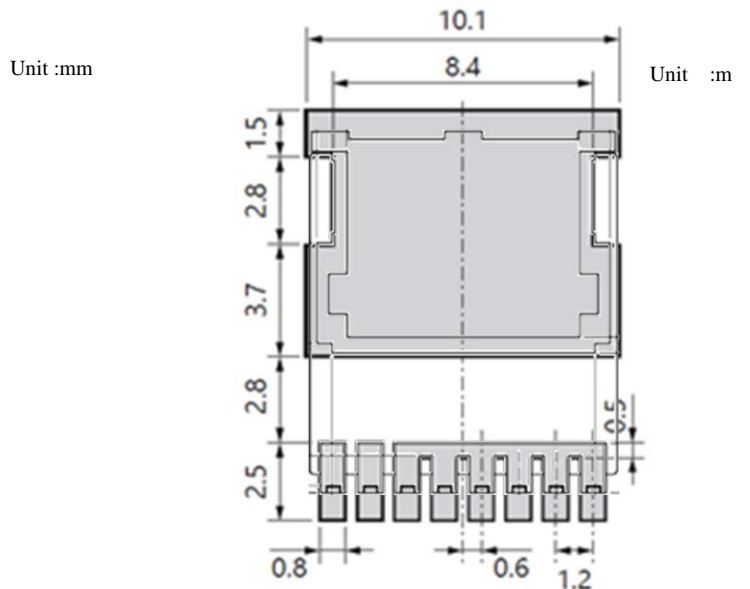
Reference Pad Dimensions + Company A TOLL
